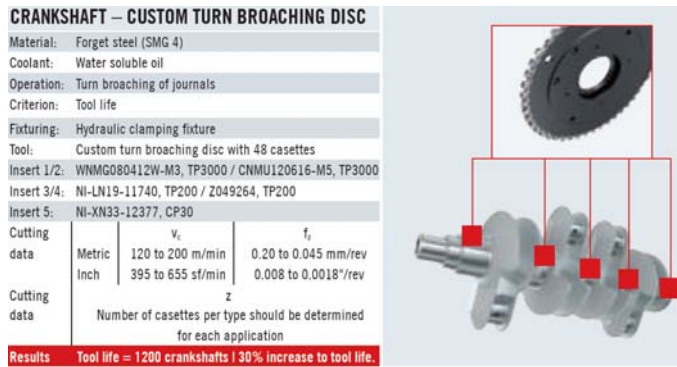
Custom turn broaching disc for crankshaft manufacturing [84].
